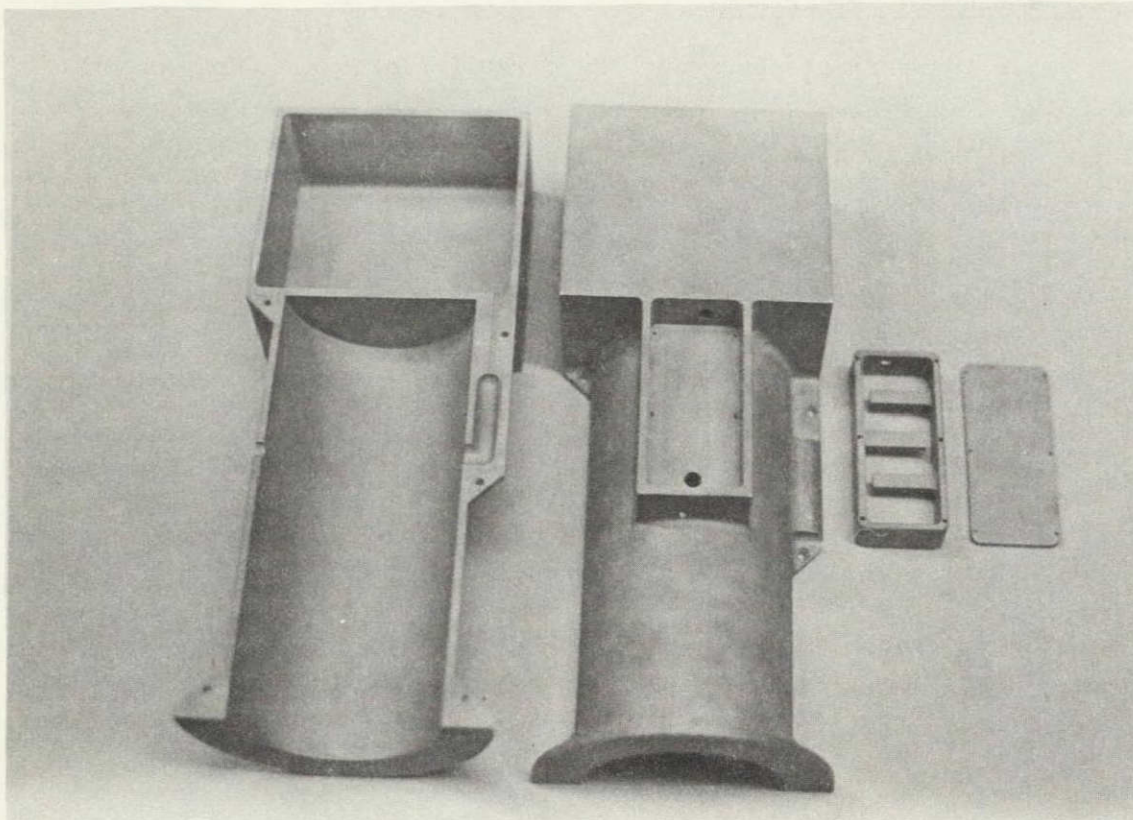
DISASSEMBLED MIXER-FEED HOUSING.
